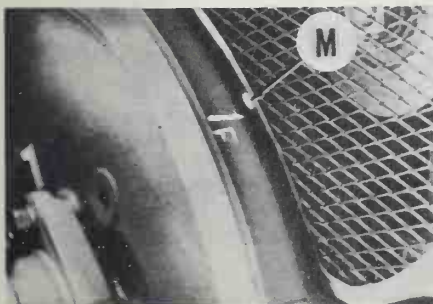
View showing location of timing mark (M) on fan cover.
